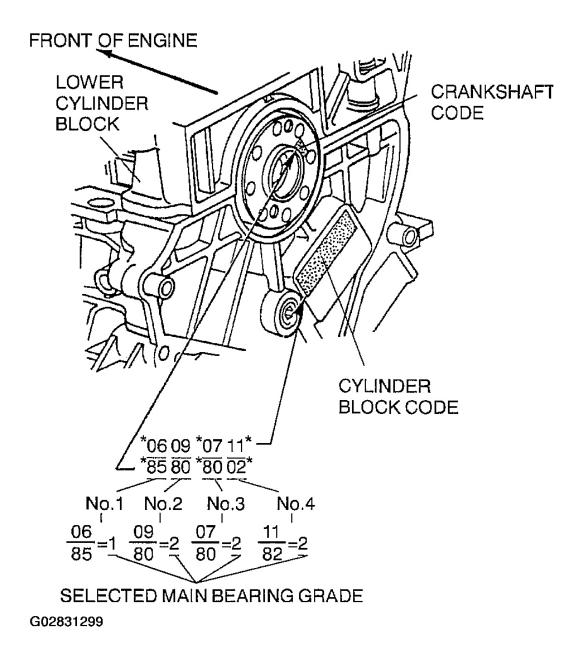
Main Bearing Selection Example Courtesy of MAZDA MOTORS CORP.
